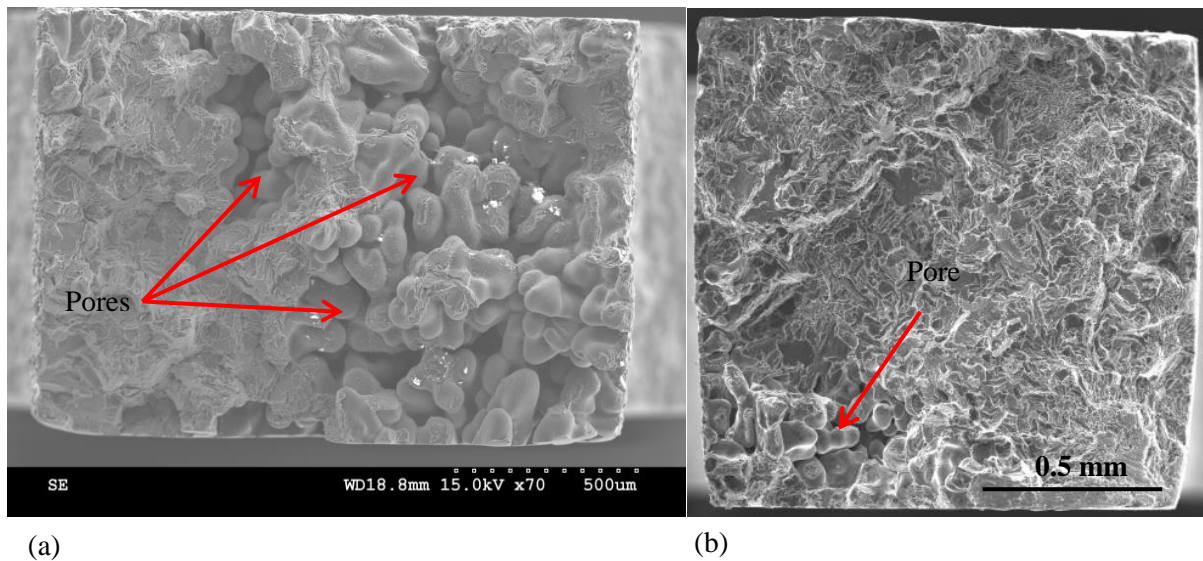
Fracture analysis of Specimens (a) T1 and (b) T2
